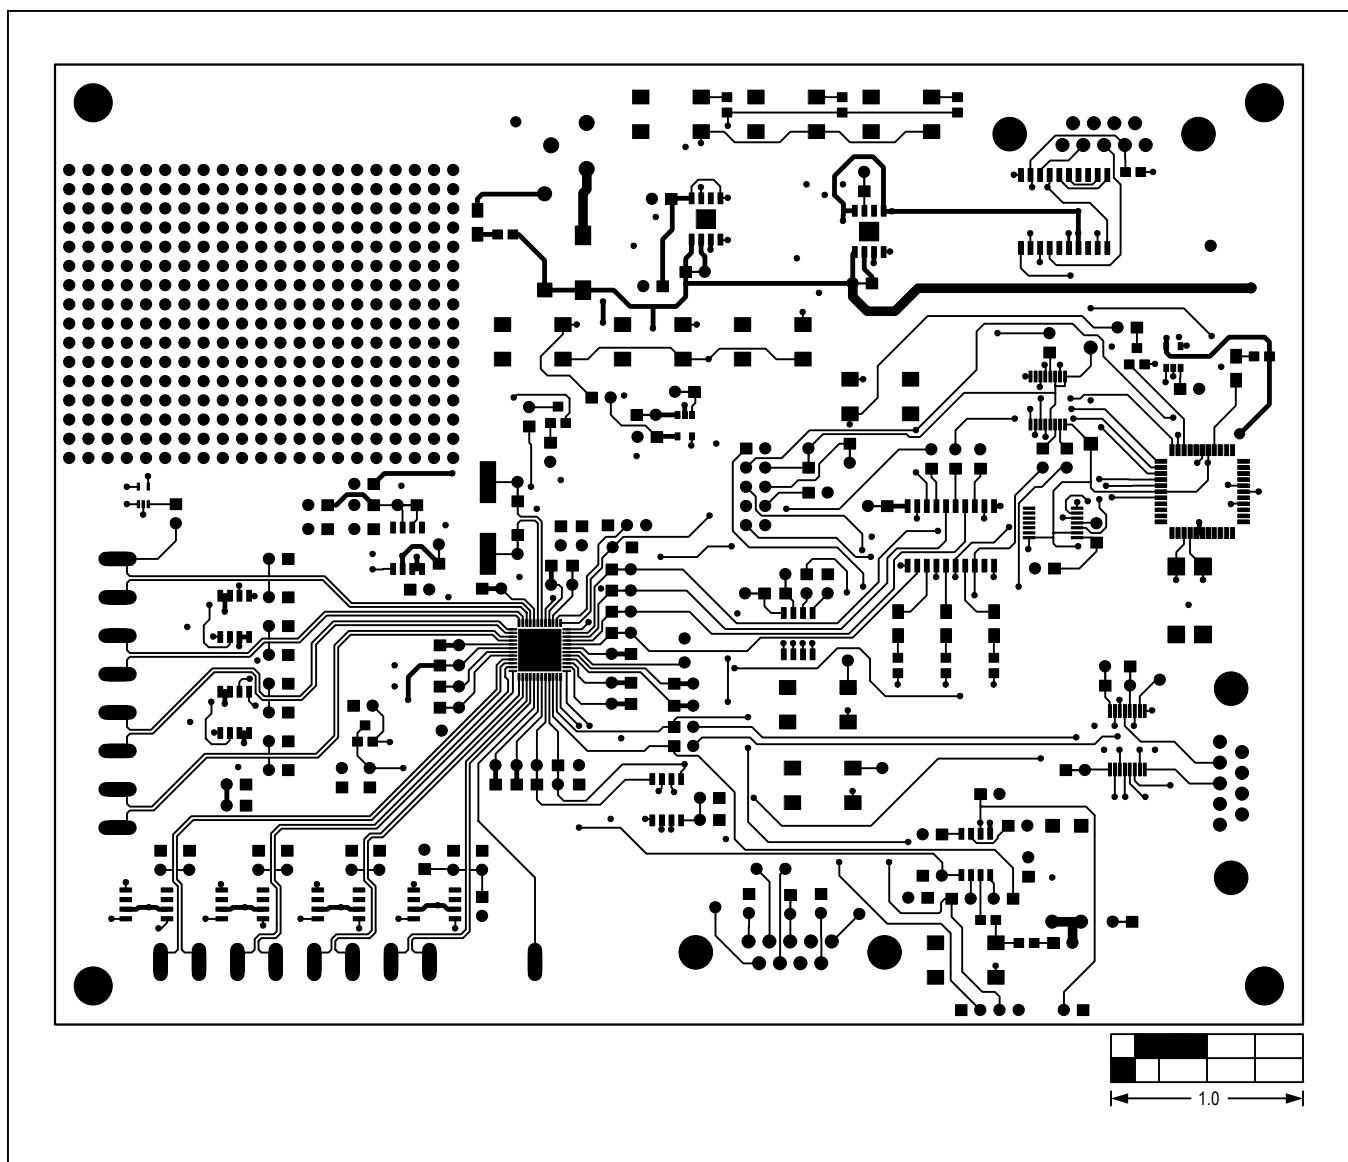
MAXQ7665 EV Kit PCB—Component Side
